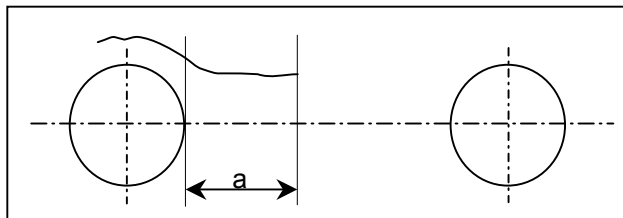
Fatigue crack length definition for specimen series 2-A fatigued with HL413VF-6 fastener
